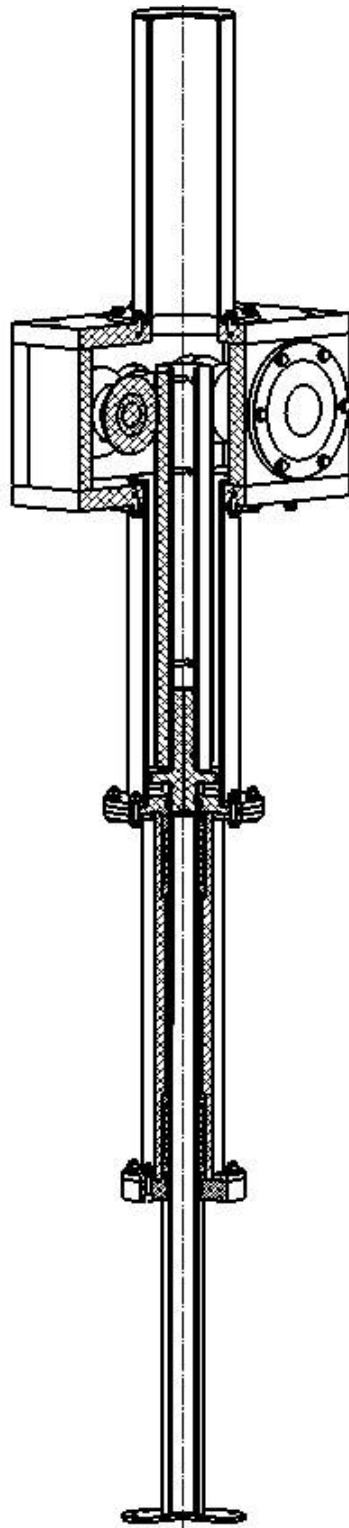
A representation of the different parts of the carter and the parts confined in them.
